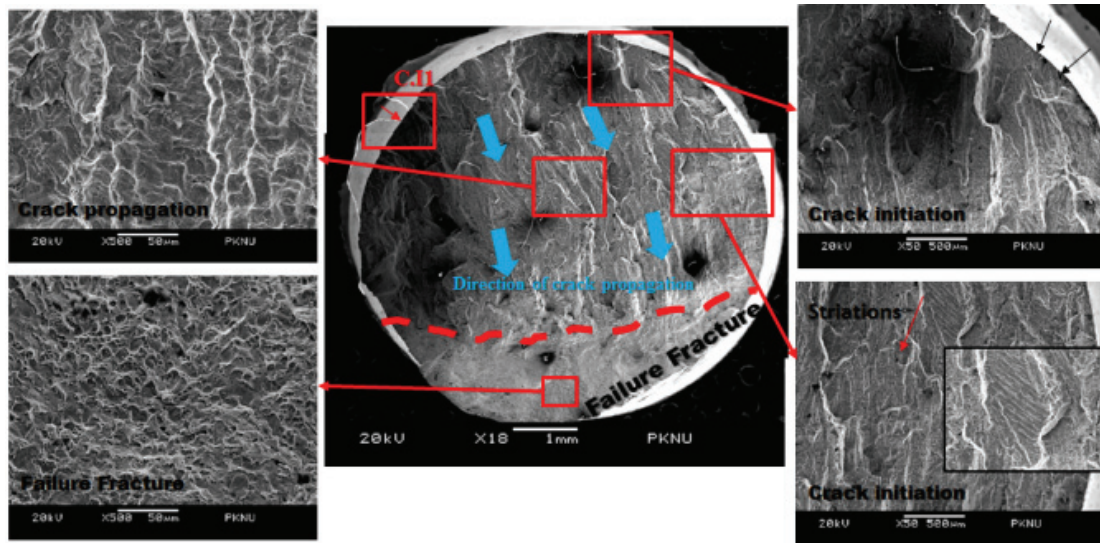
Fractured surface observation of Alloy 617 weldment tested at 1.5% of total strain range
